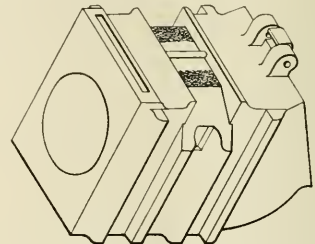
Building Up Worn Journal Box; Gas Welding Used
